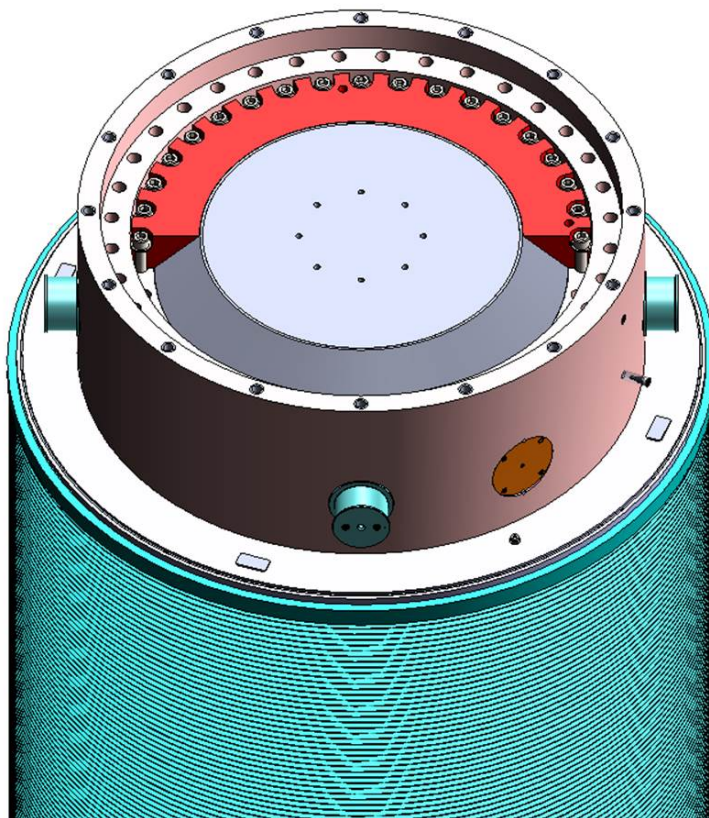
A.3: HI-STAR SHOWN WITH INNER AND OUTER CLOSURE LIDS REMOVED AND SEALING SURFACE PROTECTIVE COVERS INSTALLED ON THE CONTAINMENT CLOSURE FLANGE (SEALING SURFACE PROTECTORS SHOWN FOR EXAMPLE ONLY AND MAY VARY IN ACTUAL CONFIGURATION DETAILS)
